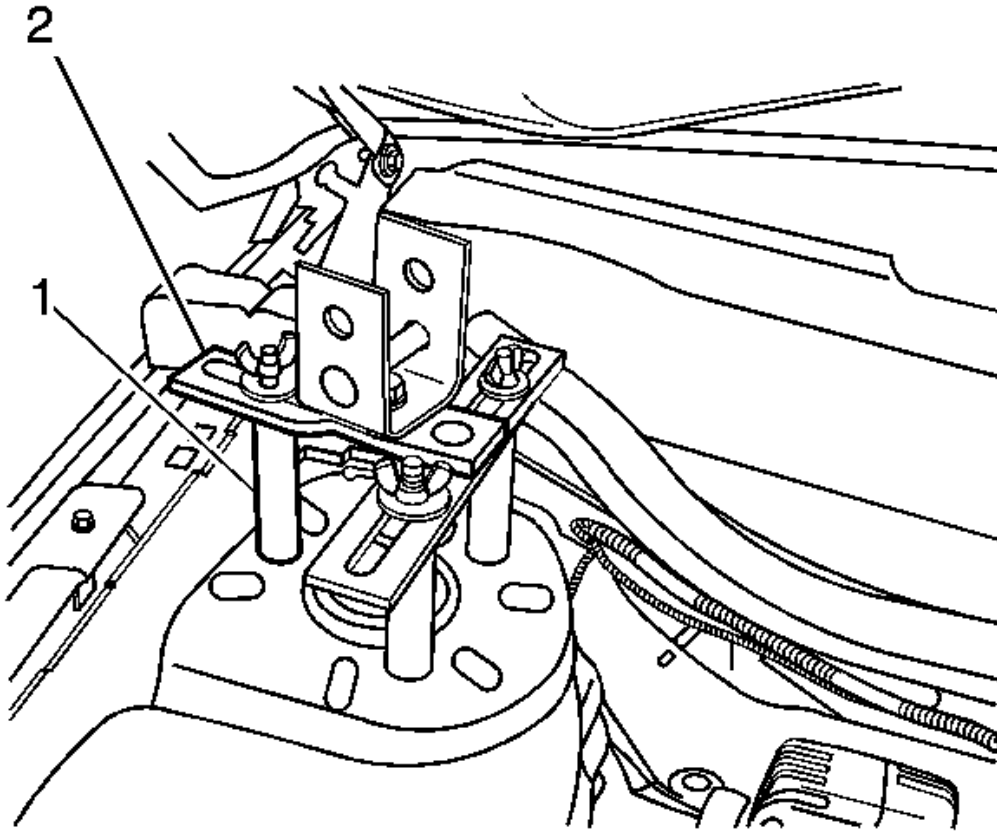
View Of J-28467-13 & J 28467-5 Strut Tower Adapter
